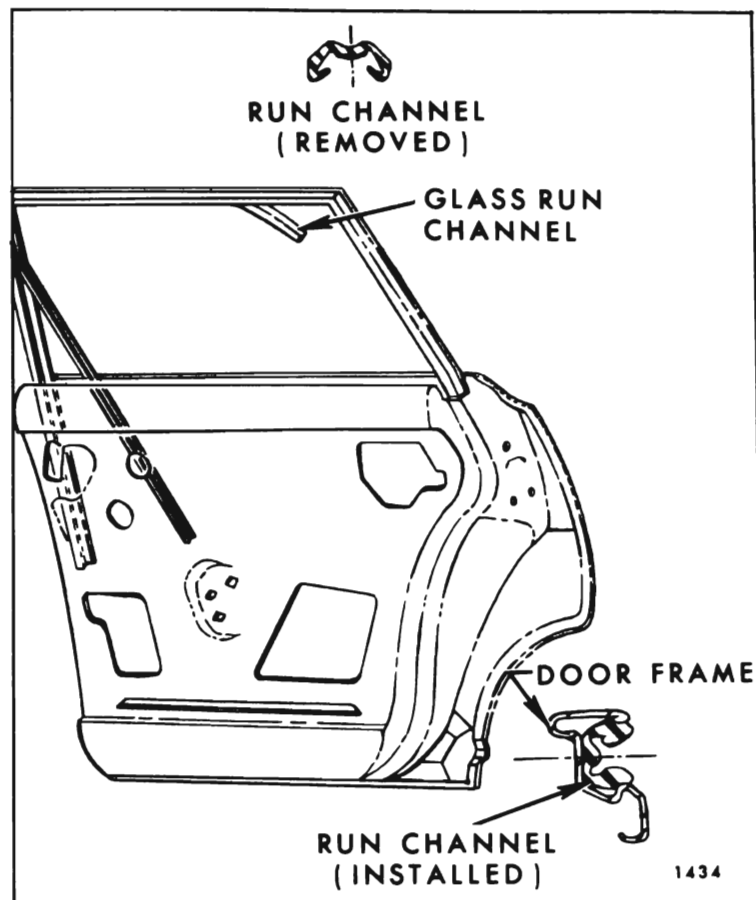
Window Run Channel Installation - "X" Closed Styles
